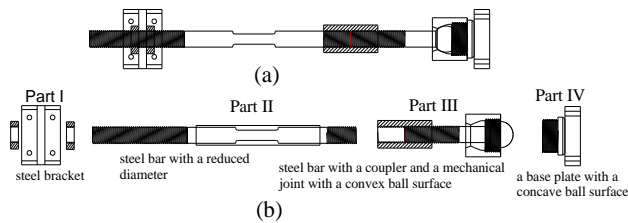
Design details of the energy dissipaters: (a) fully assembled view (b) exploded view.
